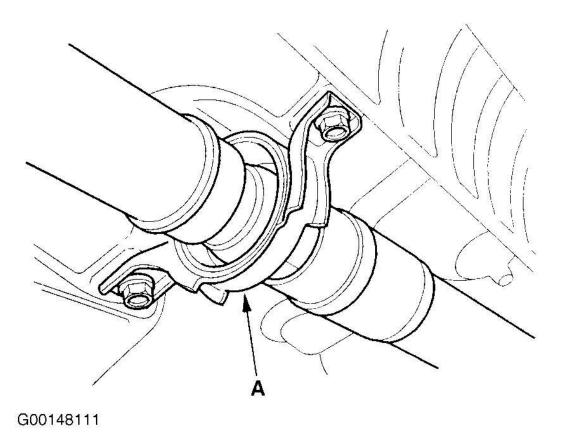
Inspecting Center Support Bearing Courtesy of AMERICAN HONDA MOTOR CO., INC.
